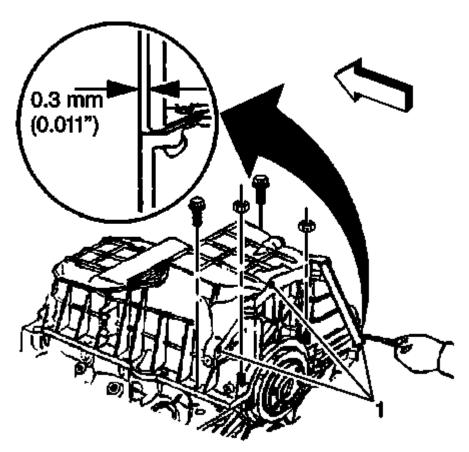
View Of Oil Pan-To-Transmission Housing Measurement Points Courtesy of GENERAL MOTORS CORP.
